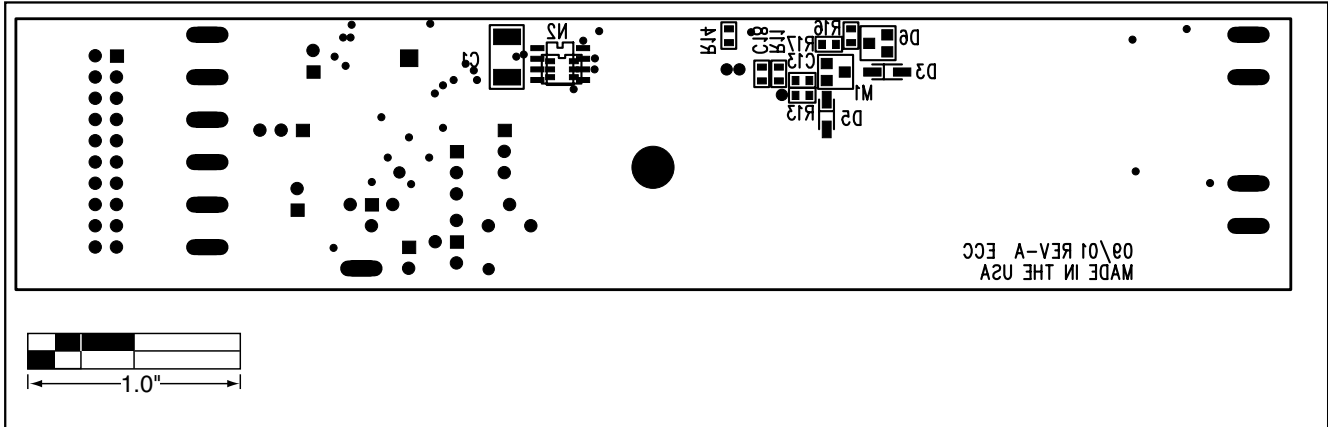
MAX1895 EV Kit Component Placement Guide—Solder Side
